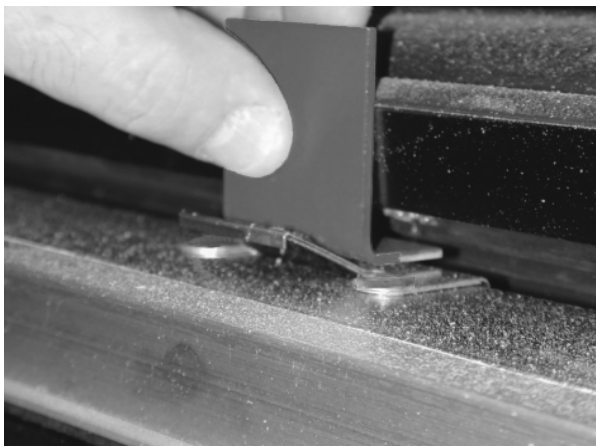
3 mm red gauge should not fit between the rivet heads and the slider
